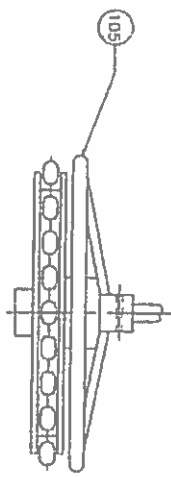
MILLIKEN PLUG VALVE, FLANGED, GEAR OPERATED W/ HANDWHEEL, 2" NUT, OR CHAINWHEEL OPTION
